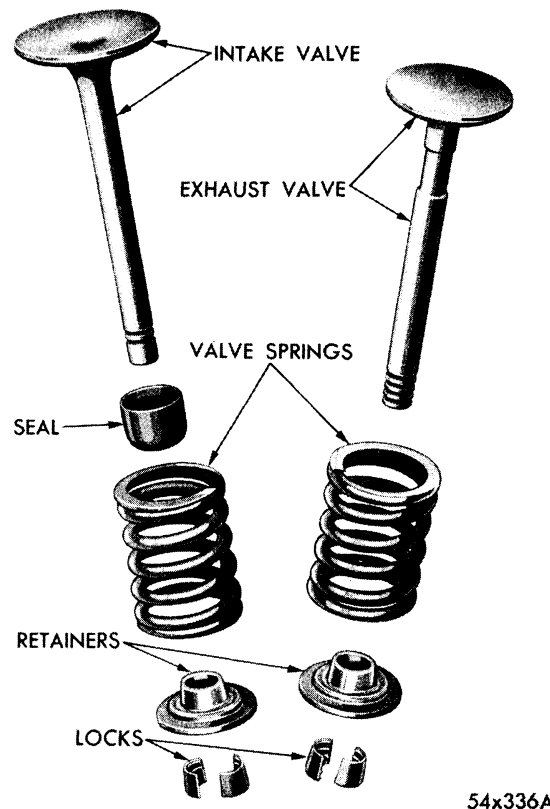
Valves, Springs, Seals, Retainers and Locks (Disassembled View)
